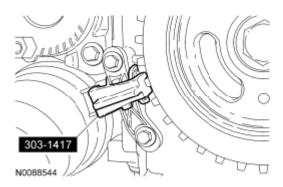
Adjusting CKP Sensor Using Crankshaft Sensor Aligner Courtesy of FORD MOTOR CO.
